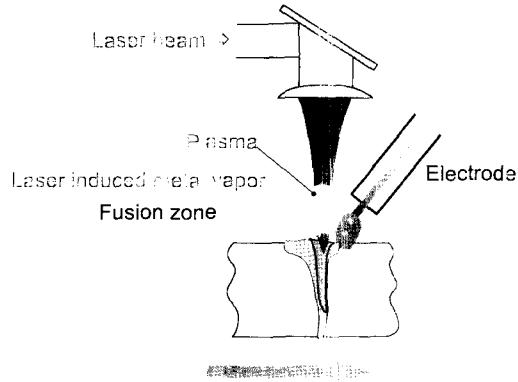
A schematic representation of laser-arc hybrid welding
